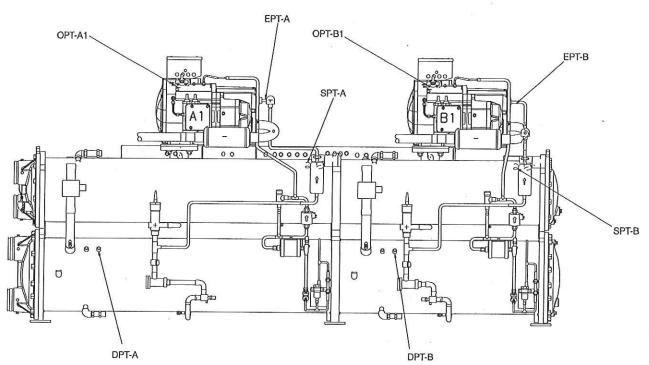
A — 30HX Pressure Transducer Locations (2-Compressor Unit)
